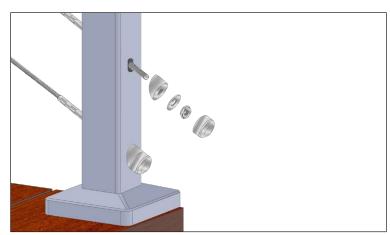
Figure AQ. Place the 34 Degree Stair Spacer on the threaded end before attaching the cover nut set to achieve the angled cable run.
